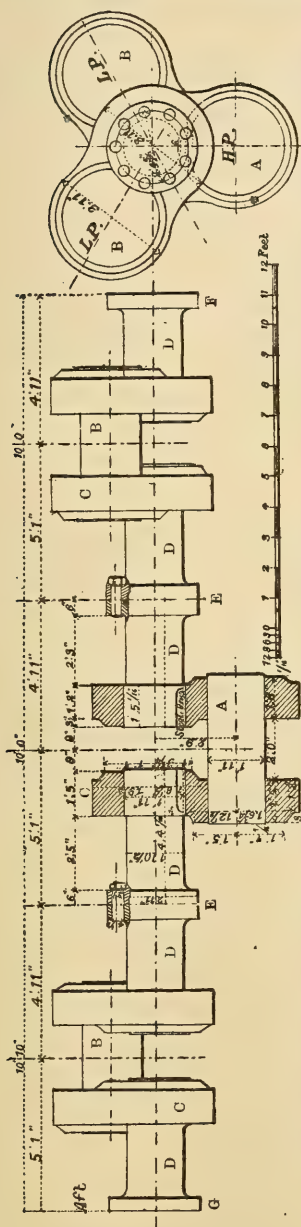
A.—Crank Shaft of Screw Steamer *Arizona*. A, Crank pin for high-pressure cylinder. B B, Crank pins for low-pressure cylinders. C C, Cranks. D D, Bearings. E E, Couplings on which eccentrics are placed. F, Disc on which eccentrics are placed. G, Coupling on which turning gear is placed.
